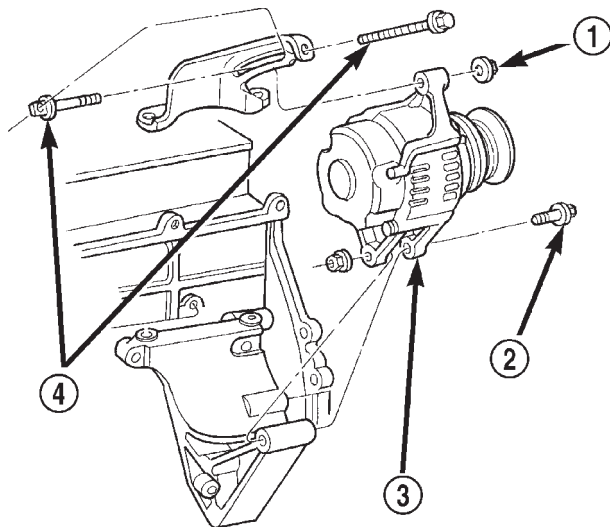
Remove/Install Generator—4.0L Engine—LHD
